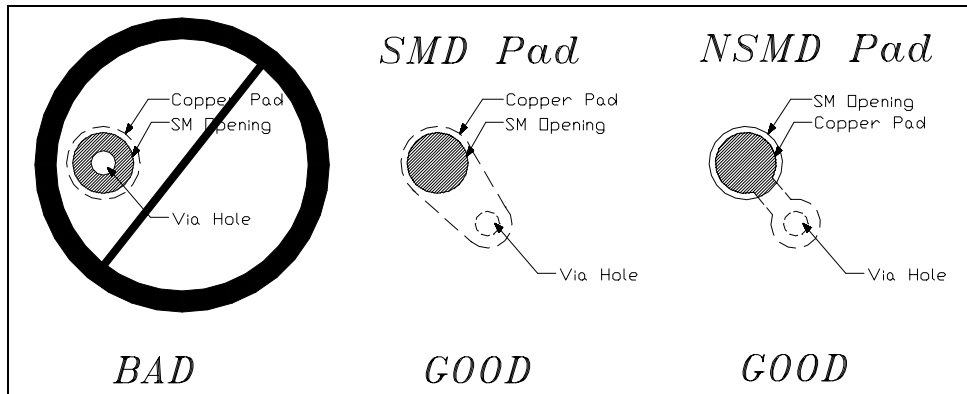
Plated Hole Placement Guideline for Connection to BGA Ball
